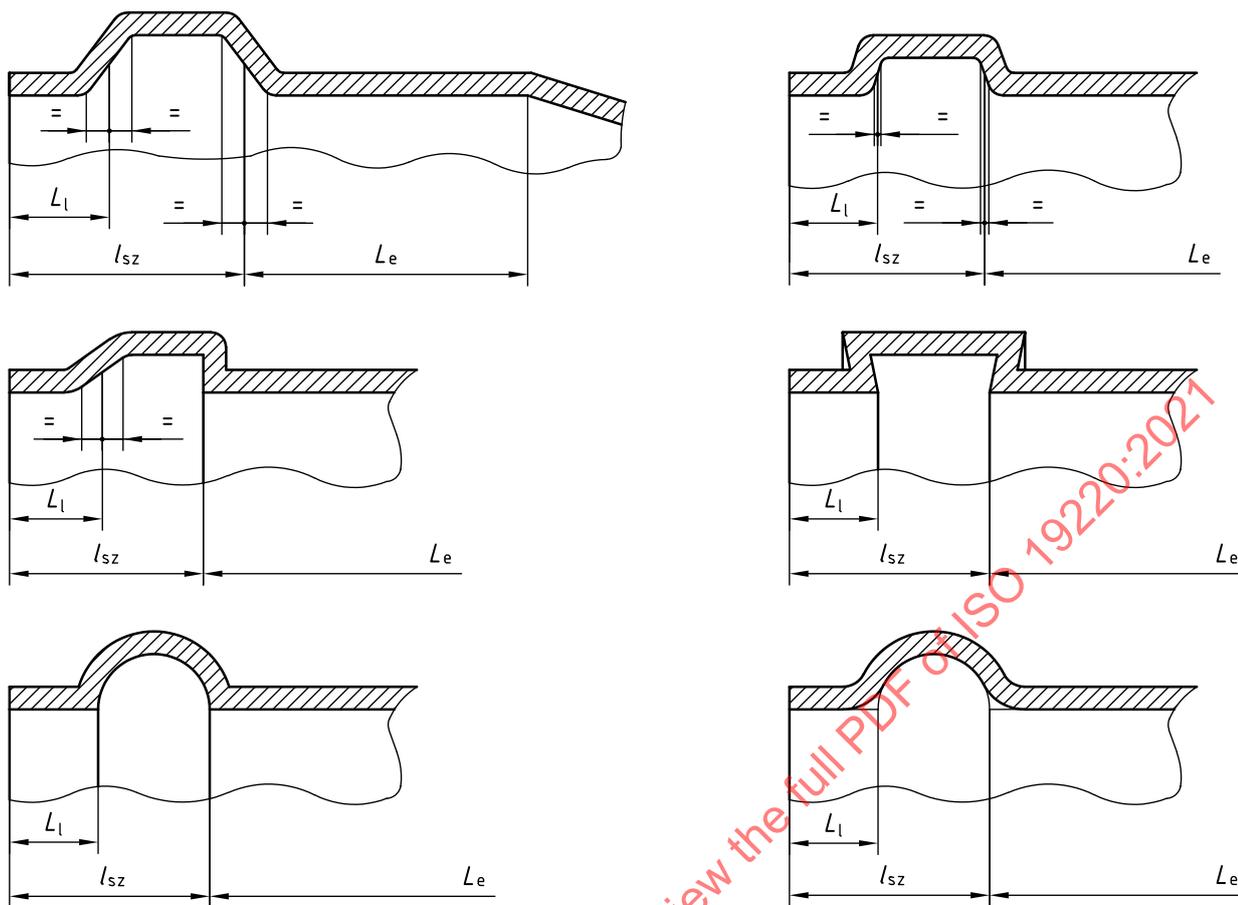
Typical groove designs for type N and dual-purpose ring seal sockets
